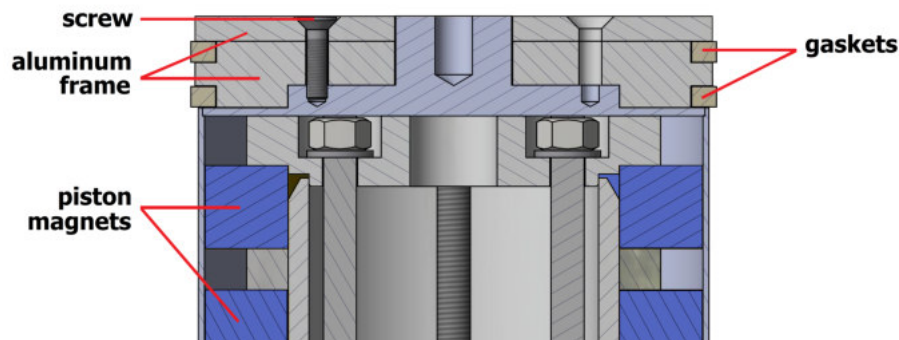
CAD drawing of the piston. Beside the new gasket design in the form of two rings, the dead volume has been reduced by a larger aluminum frame. Drawing by C.Huhmann.
